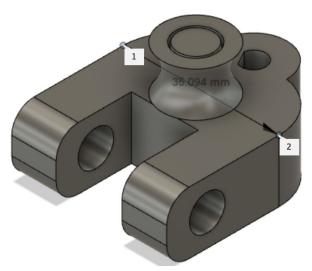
Connector to mount rigid arm to driving motor and pulley system for adjustable length feature.
